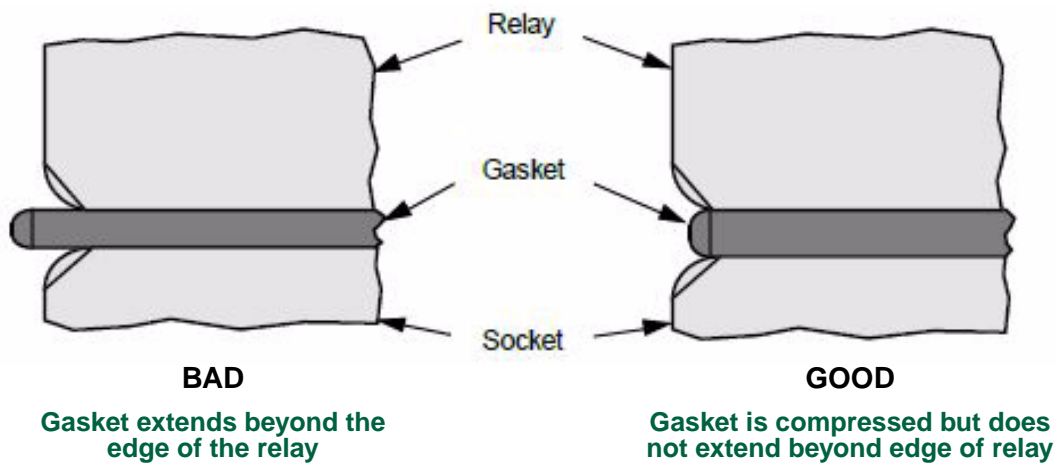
COMPRESSED GASKET BETWEEN RELAY AND SOCKET
